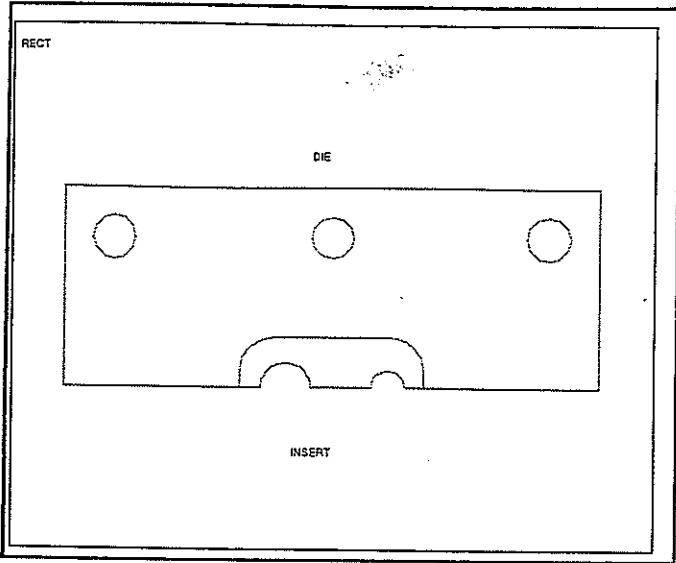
Miniblock Tooling - Rectangular Shape Top View
